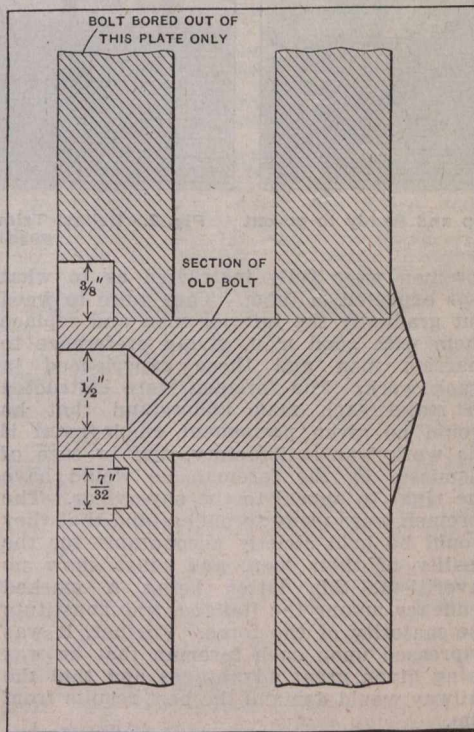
Section Through Boiler Plates, Showing Section Removed by Each Cutter.
